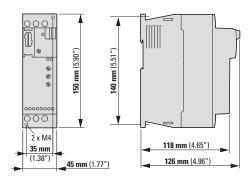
Dimension drawing DS7 with SWD – Size 2 (16 – 32 A)
